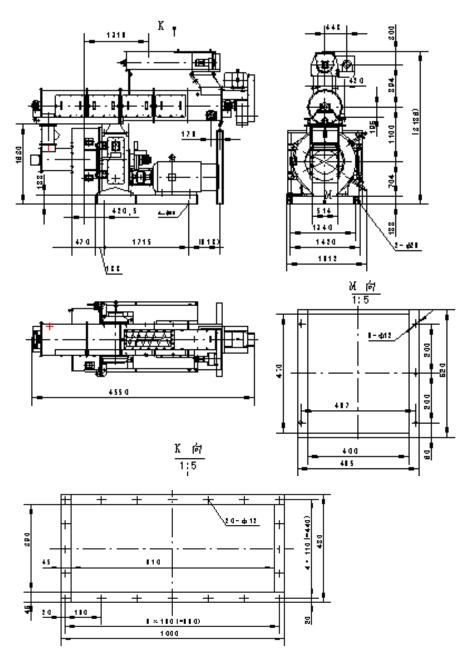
SZLH678 (768) MX Pellet Mill Sample
